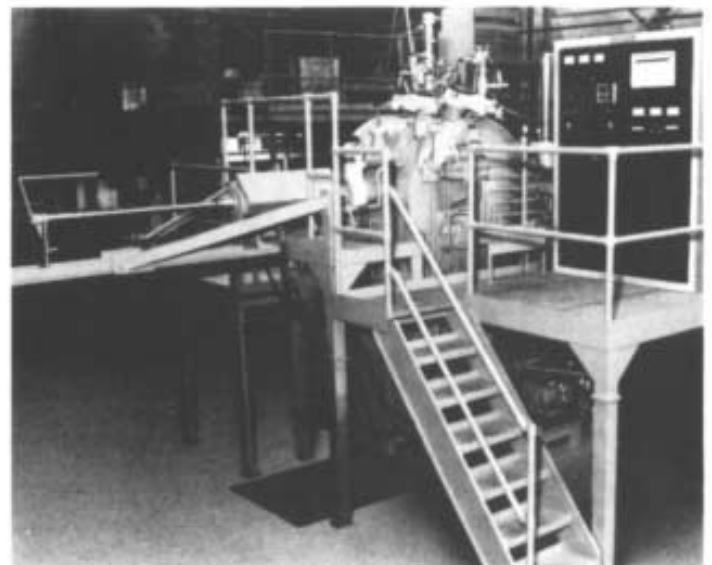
Vacuum Equiax Casting Furnace with horizontal charger.
